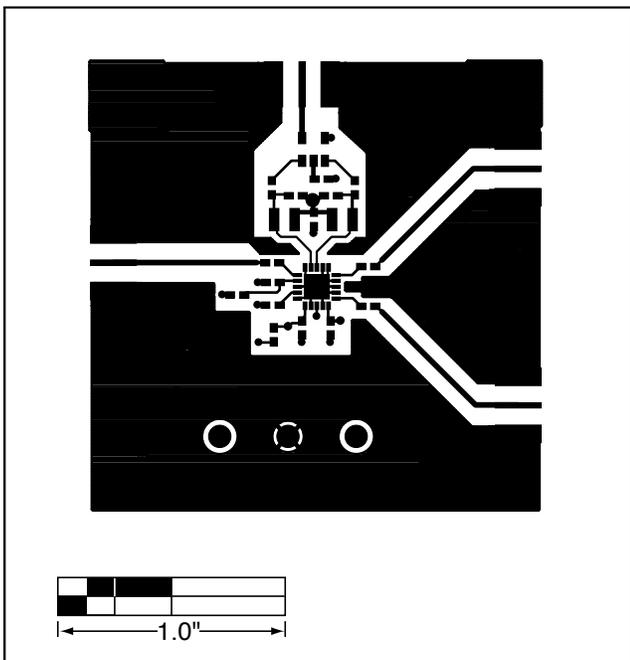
MAX9982 EV Kit PC Board Layout—Top Layer Metal
